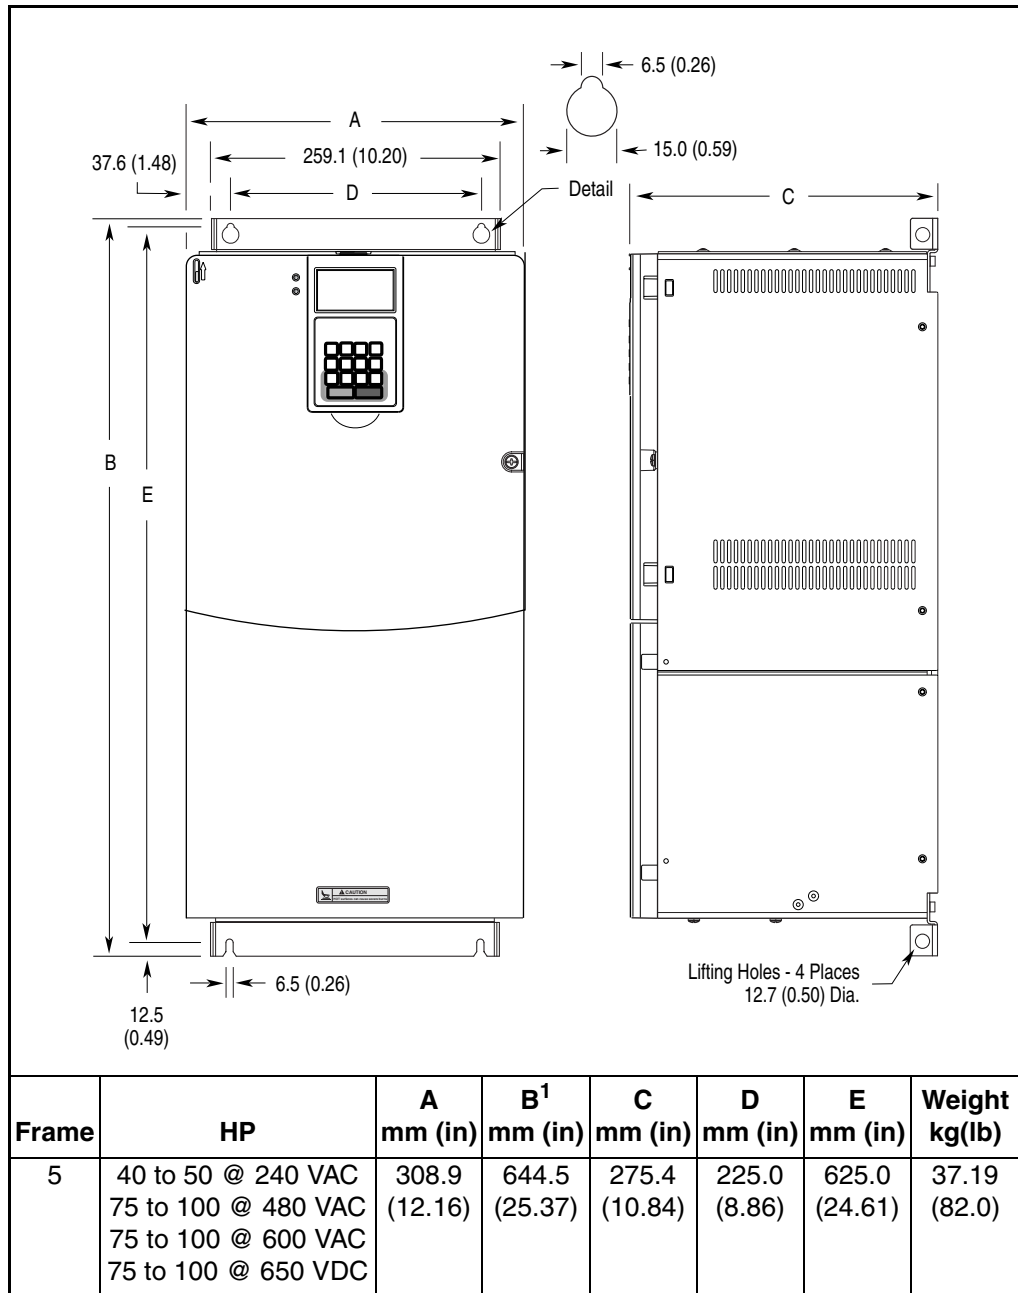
GV6000 Drive Dimensions Frame 5
